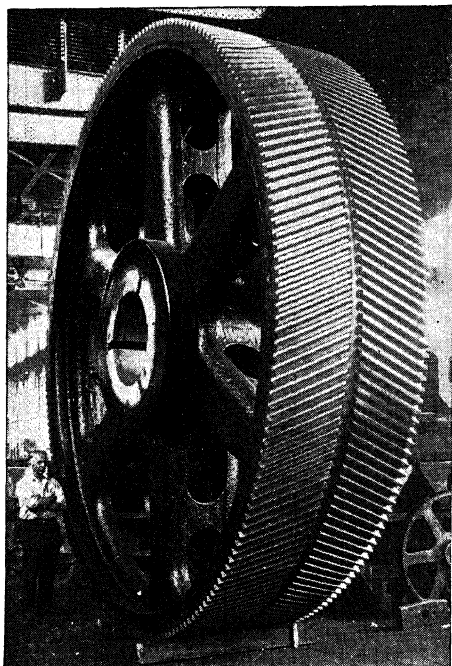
Staggered-tooth herringbone gear, “Wuest” type. (Courtesy Mesta Machine Company.)
